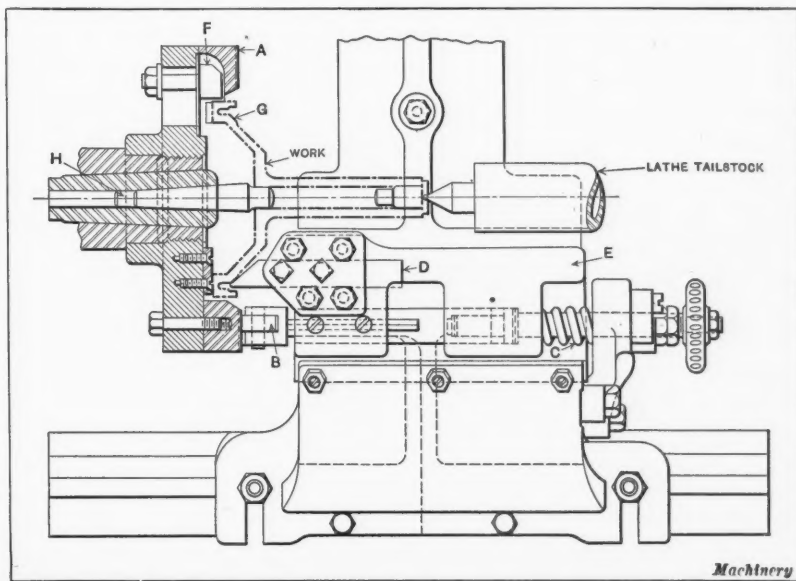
Assembly View of the Special Attachment employed in turning Calks on Forgings
